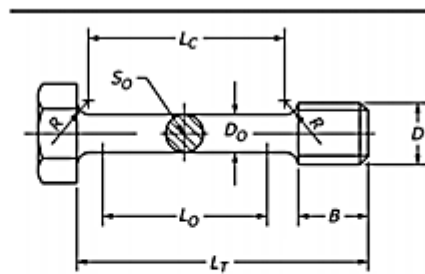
Tension Test Specimen for Bolt with Turned-Down Shank for Inch Bolts
